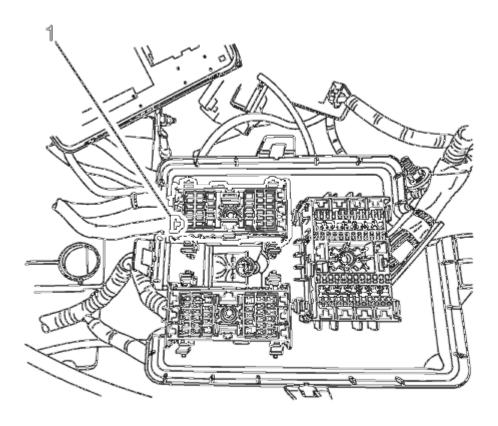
Wiring Harness - Top Of Engine Courtesy of GENERAL MOTORS COMPANY
